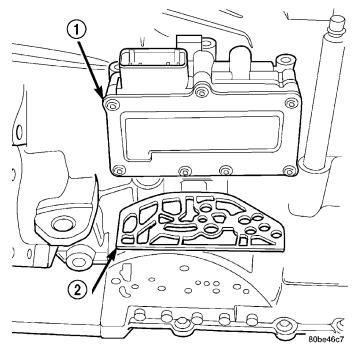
Solenoid/Pressure Switch Assembly and Gasket
